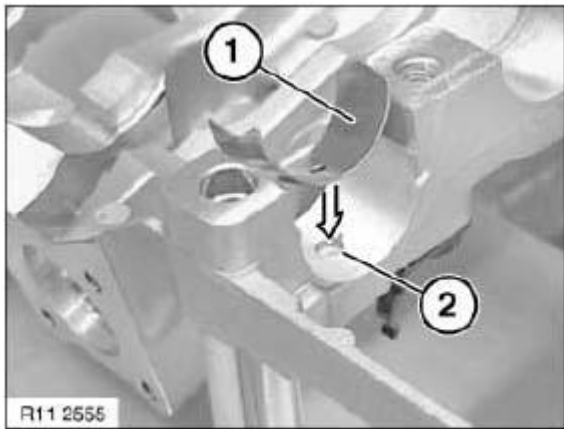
Inserting Bearing Shells Into Bearing Bracket
